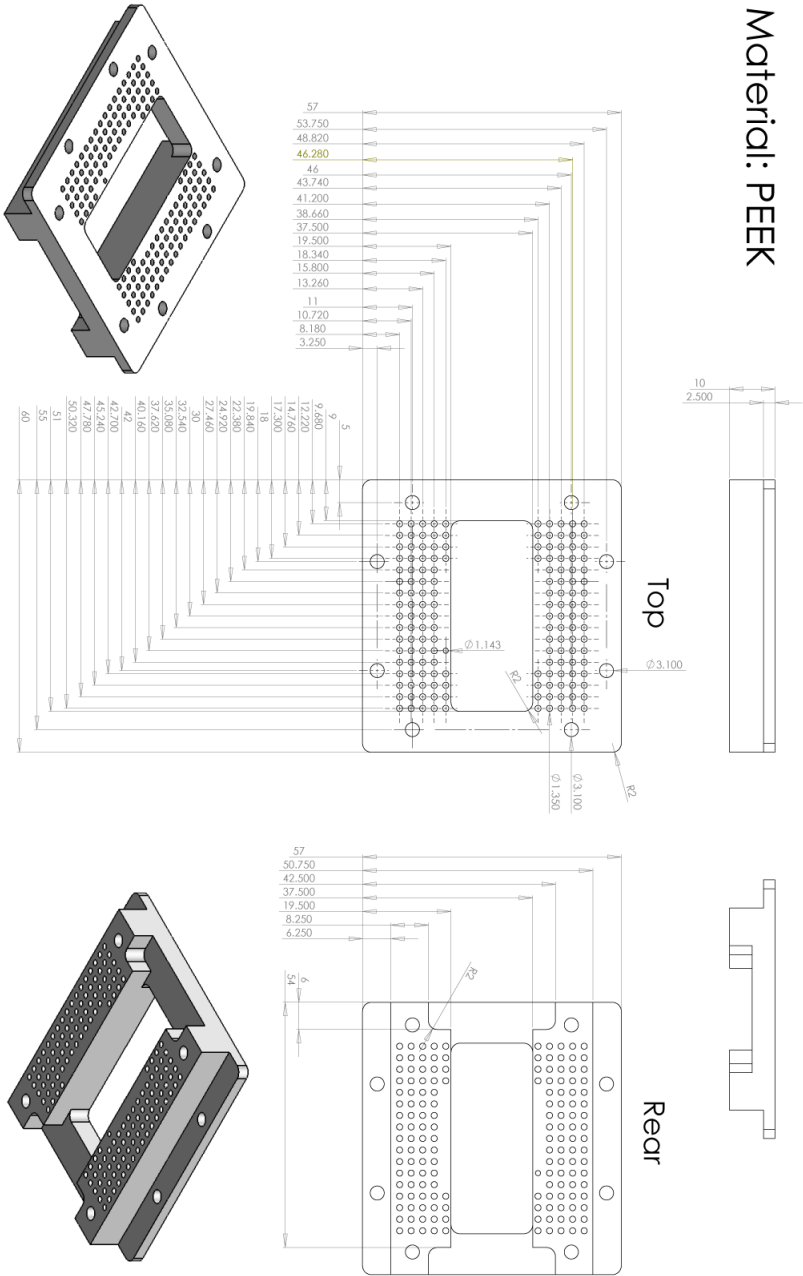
A SolidWorks drawing of the middle PEEK plate.
